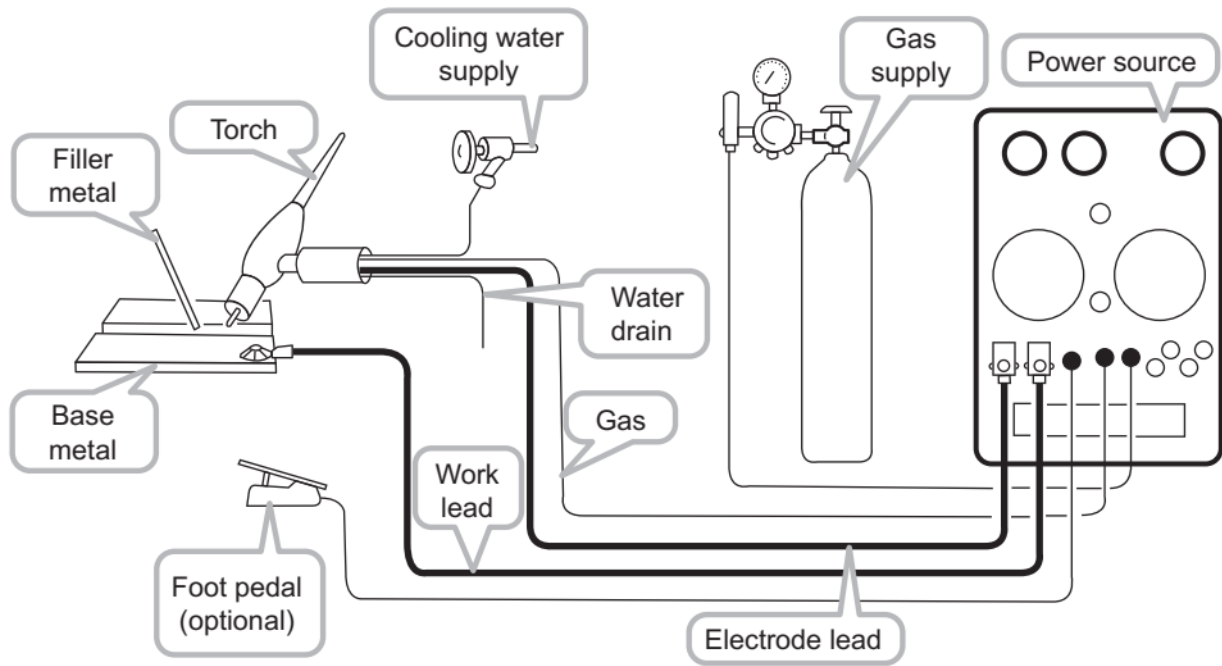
Equipment used in gas tungsten arc welding
